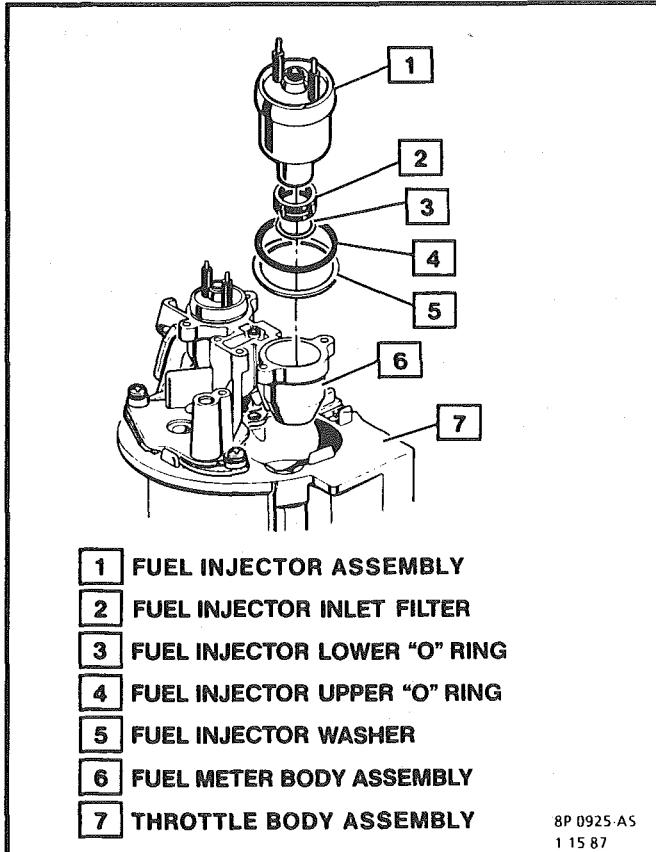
Model TBI 220 Fuel Injector Parts
